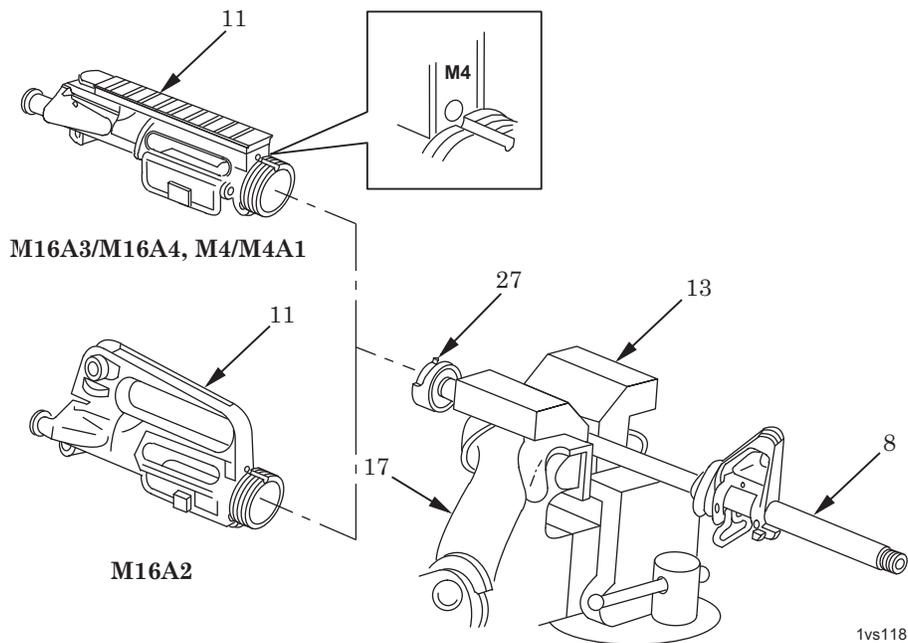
Alignment of Barrel Assembly and Upper Receiver Assembly.
